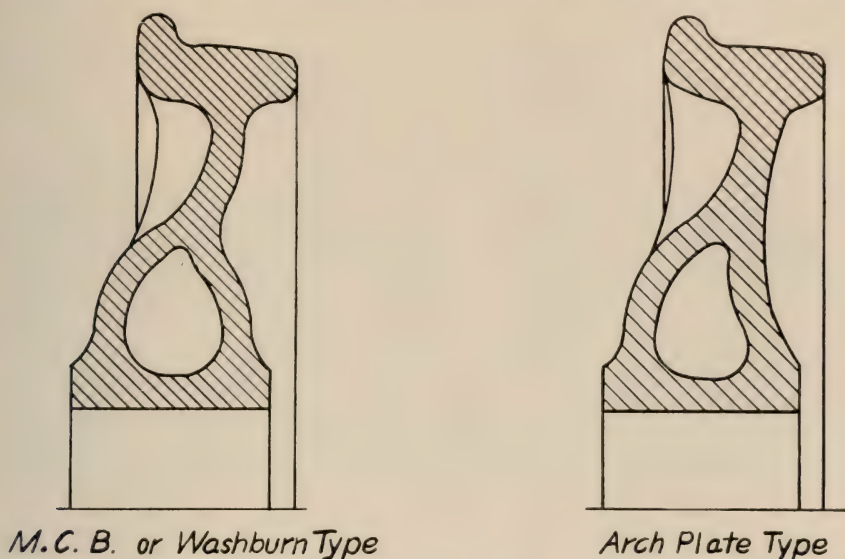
SECTIONS OF CHILLED CAR WHEELS
